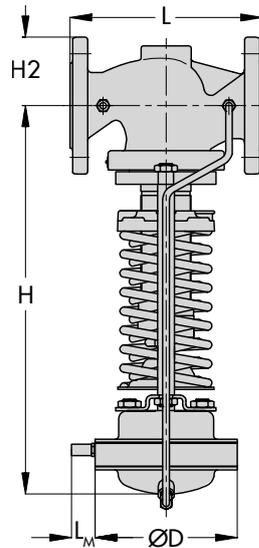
Dimensions · Type 36-4 Safety Shut-off Valve (SSV) with integrated pressure reducing valve
